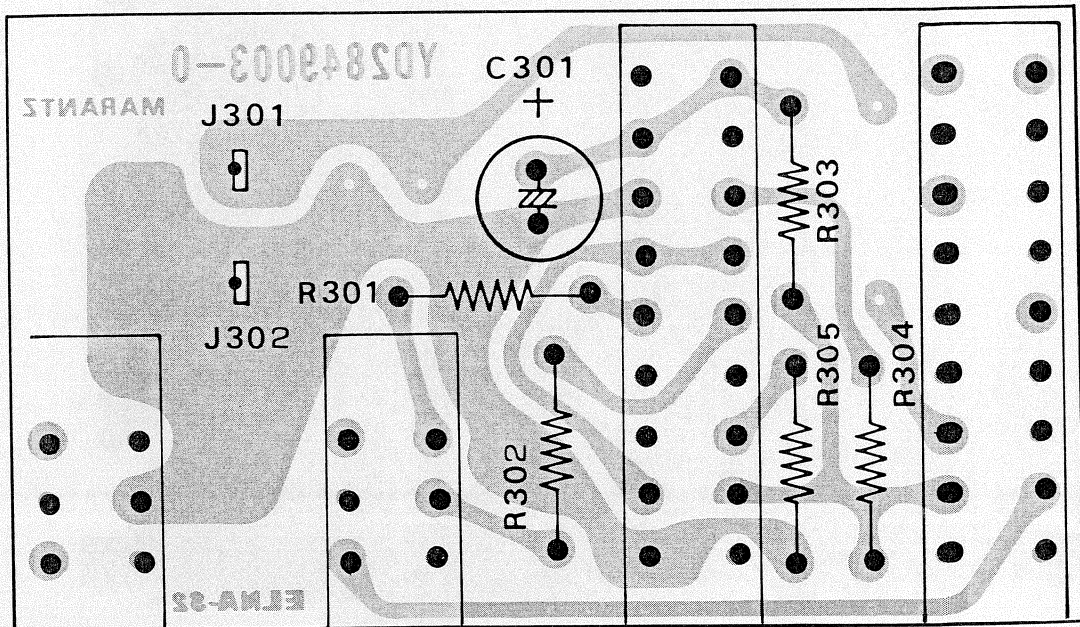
FM, AM, Mono and Muting Switch Assembly P300 Component Locations
